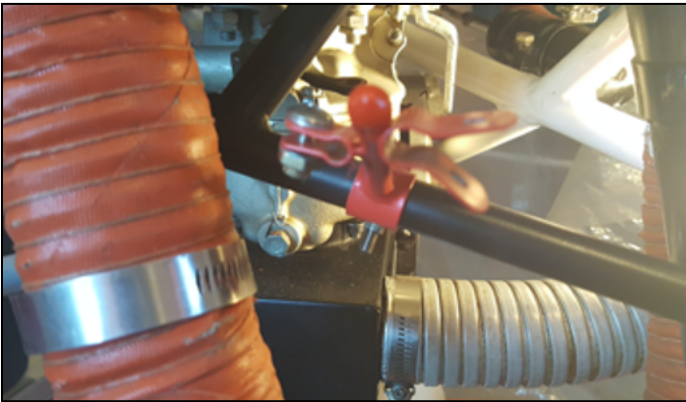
New replacement throttle and mixture cable bracket (painted red), installed on engine mount. The carburetor throttle arm can be seen beyond the right bracket clamp. The open-ended tube on the new bracket has been covered and sealed.
